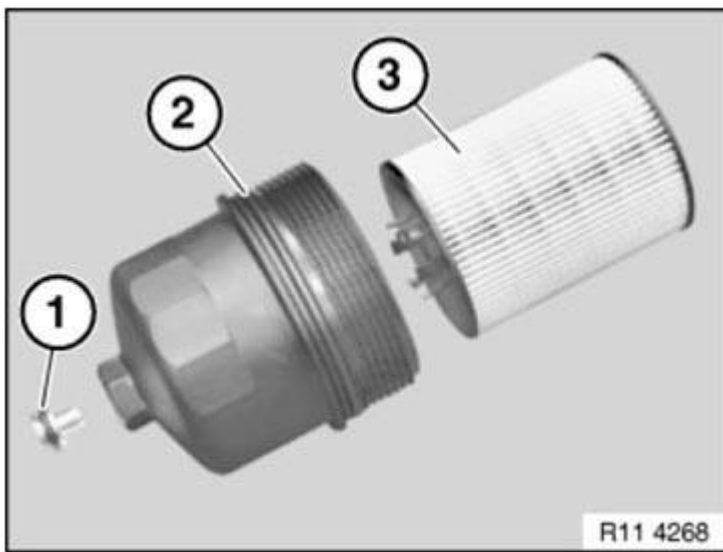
Identifying Sealing Ring And Oil Filter Element
